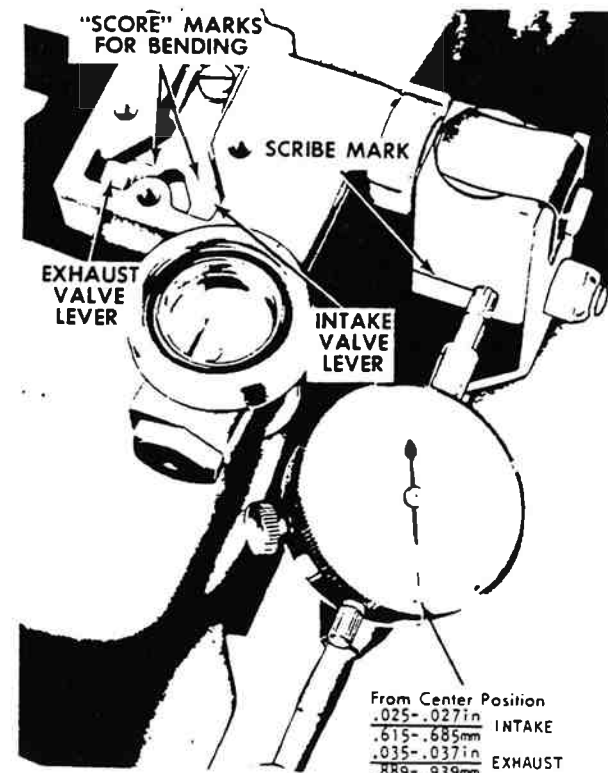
Adjusting Air Intake Valve Lever Gap.
